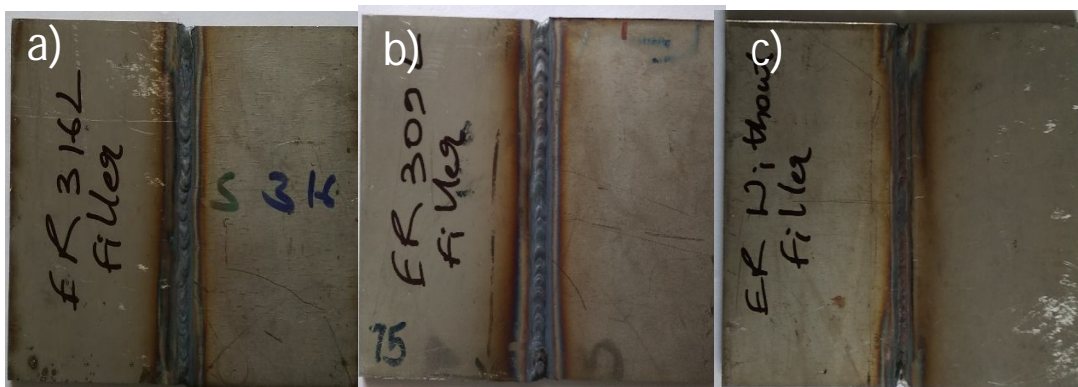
a) ER316L b) ER 309L and c) Without Filler weld plate
